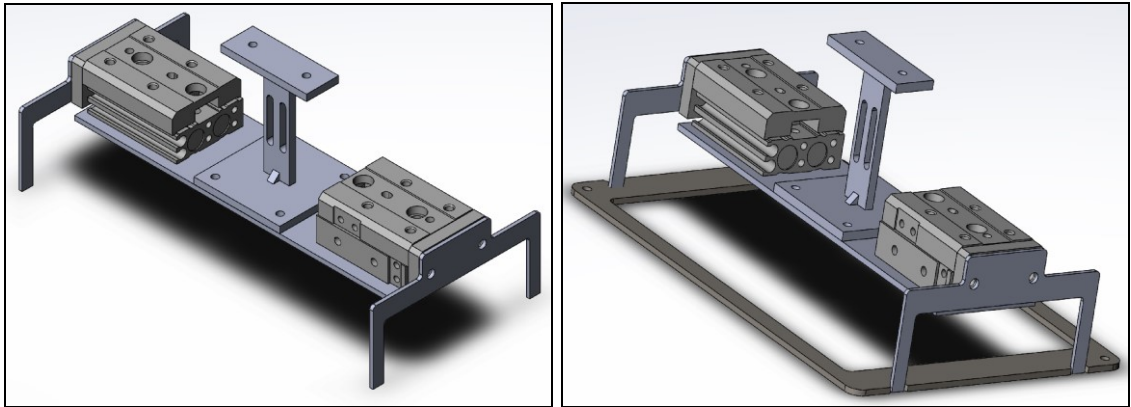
Finalized EOAT with attachment to integrate with tool holder (left); EOAT grasping the paper clamp
